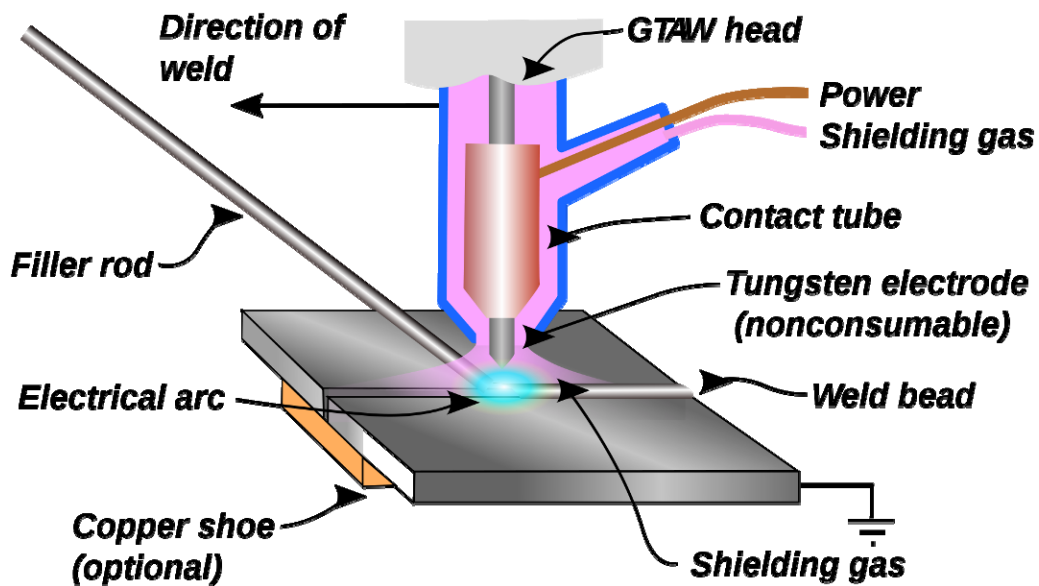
Schematic of gas tungsten arc welding (GTAW) [Welding Handbook]
